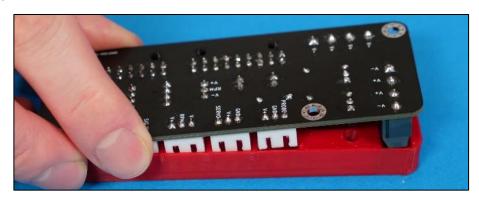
Removal of the completed PCB from the jig and completed PCB.
